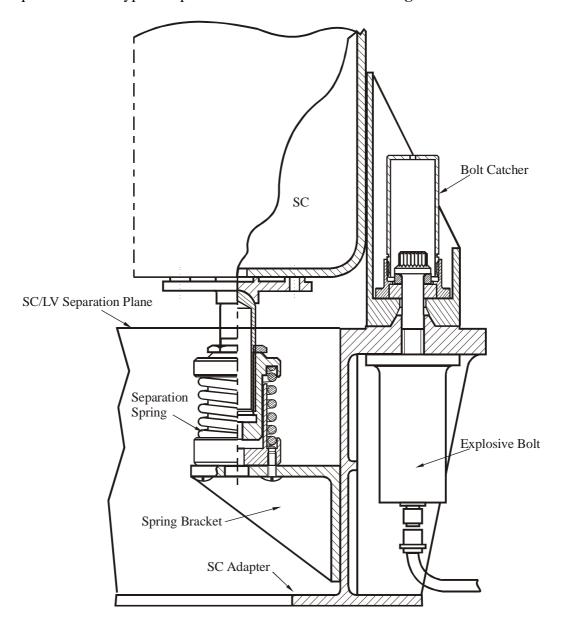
Typical Separation Mechanism for Explosive Bolt Interface
